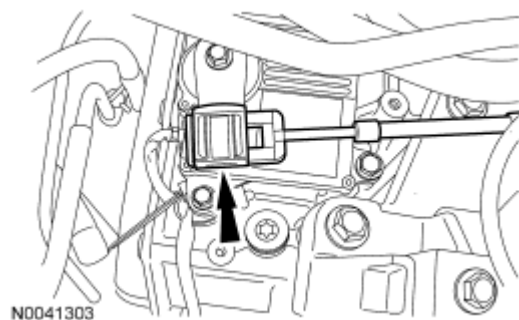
Identifying Transmission Control Module Electrical Connector
